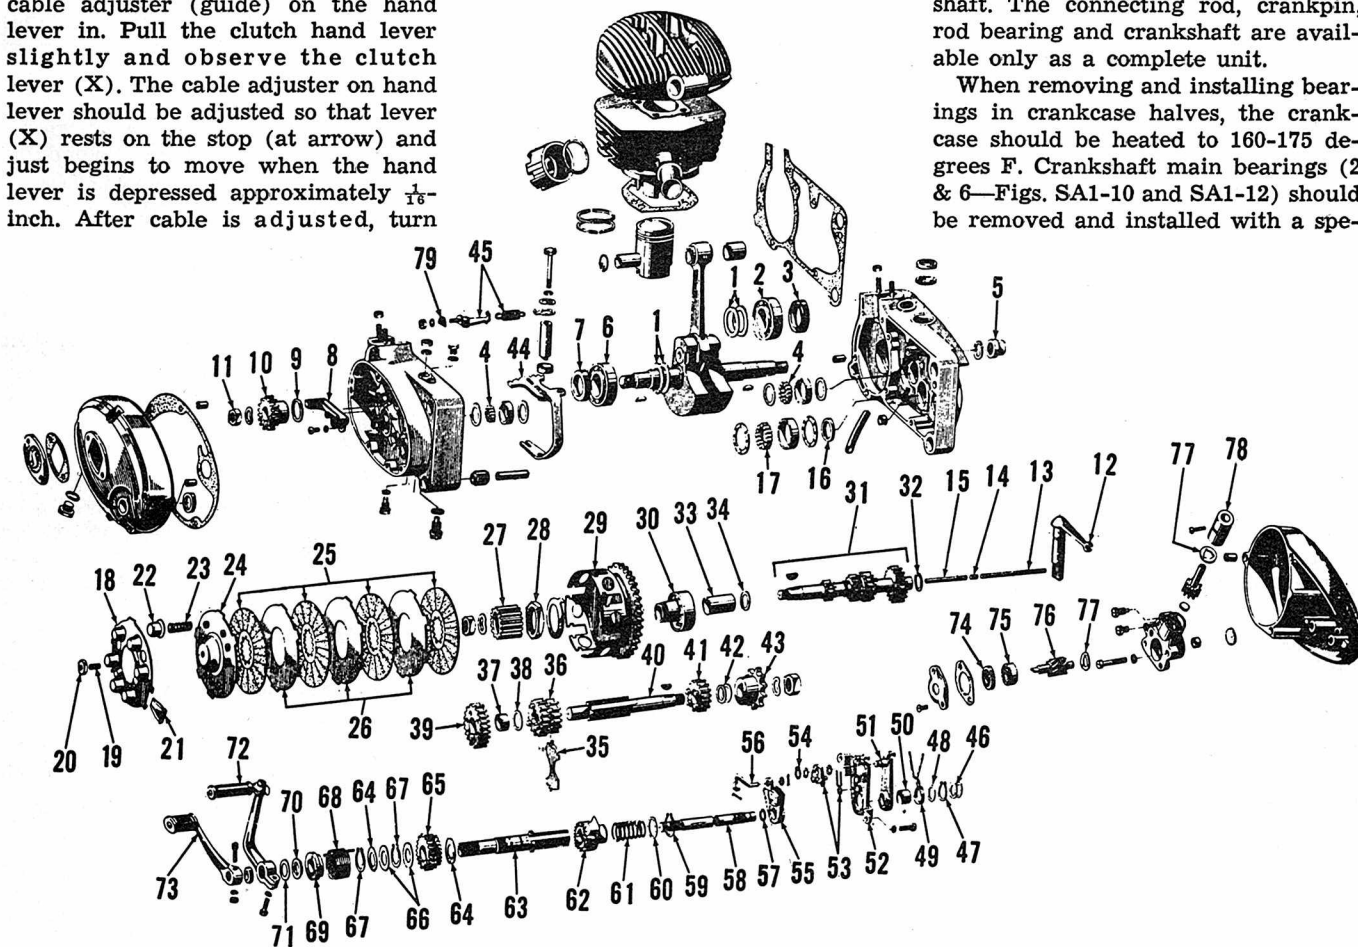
Exploded view of the K-103 engine and transmission assembly.
